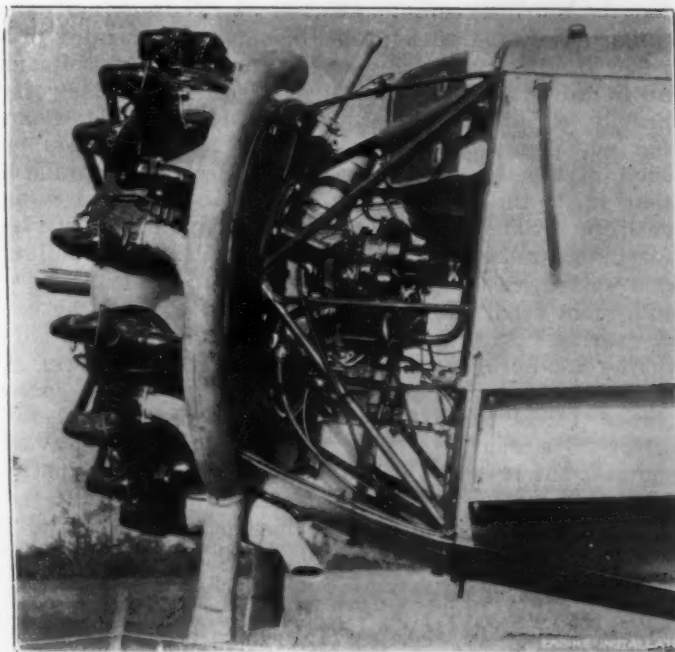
EXHAUST COLLECTOR-RING AND CARBURETER HEATER
